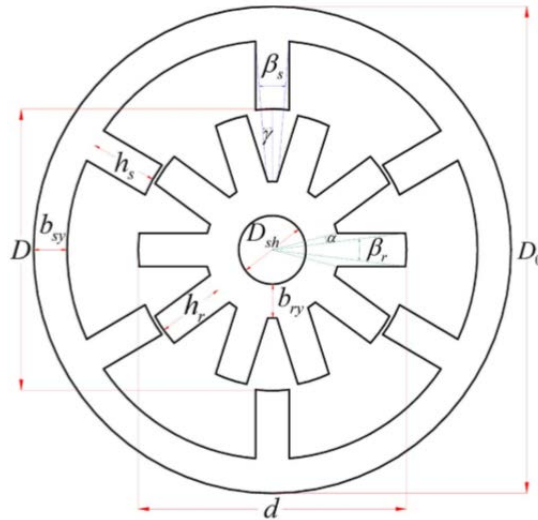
Geometrical dimensions of the 6s/10p SRM [44].
